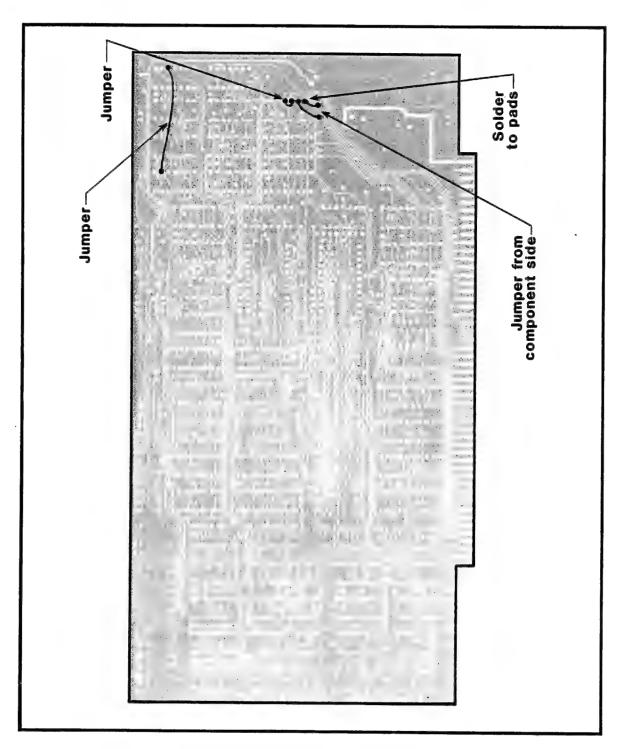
WDI-II MODIFICATIONS - SOLDER SIDE
